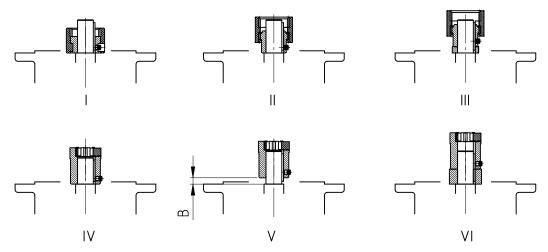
Fitting the coupling onto the motor shaft - various types of coupling
